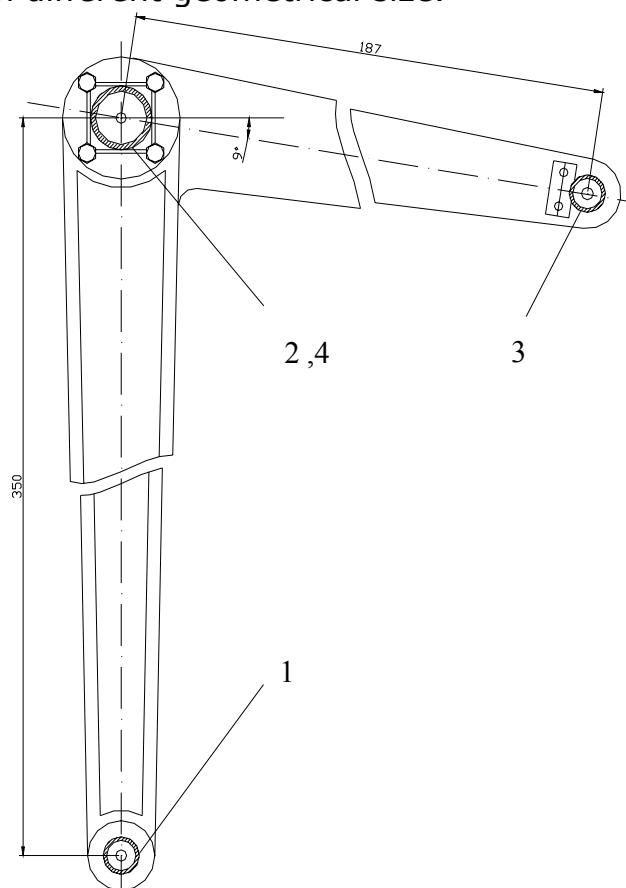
SUB ENSEMBLE OF FIRST WIRE BRAKE MECHANISM
